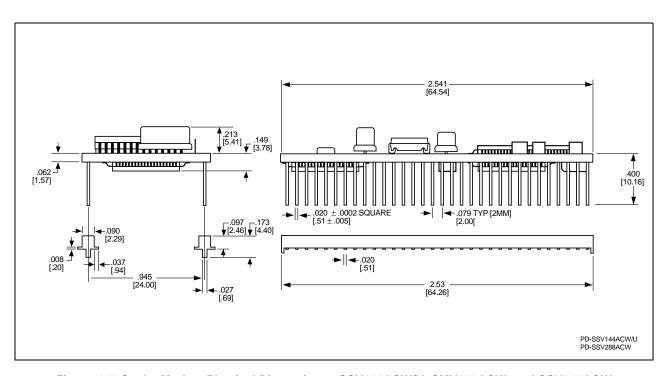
SocketModem Physical Dimensions - SSV144ACW/U, SMV288ACW, and SSV288ACW
